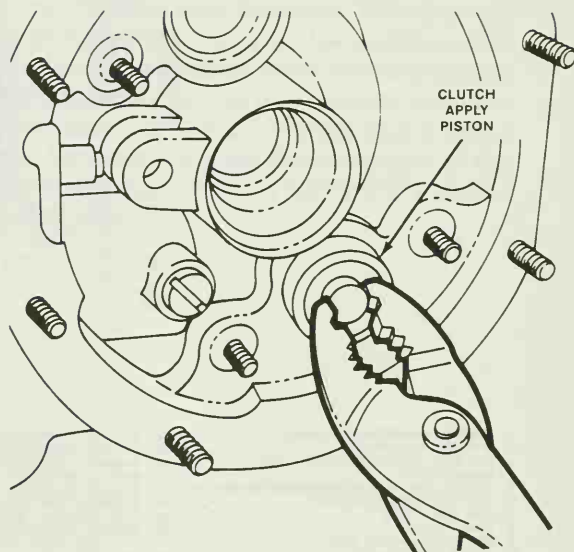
The clutch apply pistons are removed with pliers. (American Motors Corporation)
